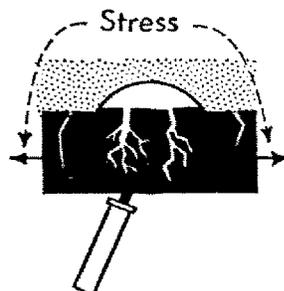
Stress Corrosion Cracking. (Magnified)
